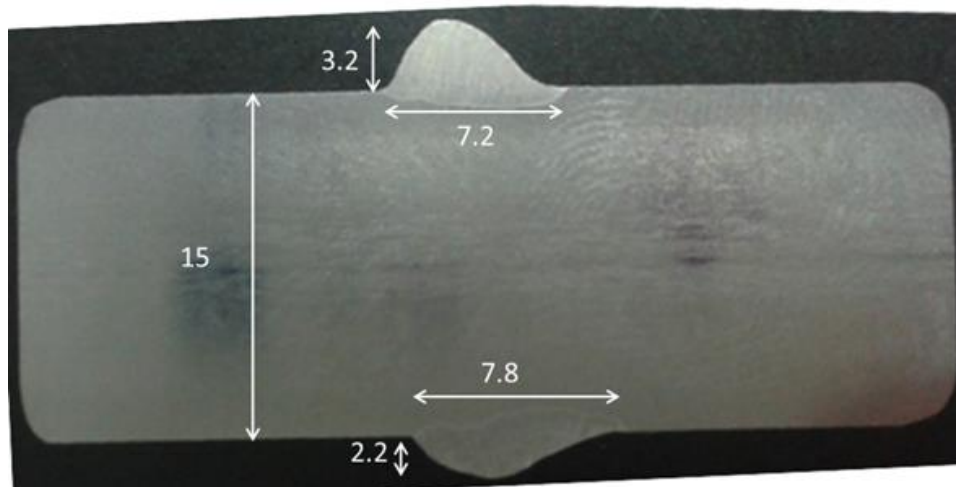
Micrograph of the weld bead cross section taken by Elise Chevallier. The small level of weld penetration into the parent material is visible under both weld beads.
